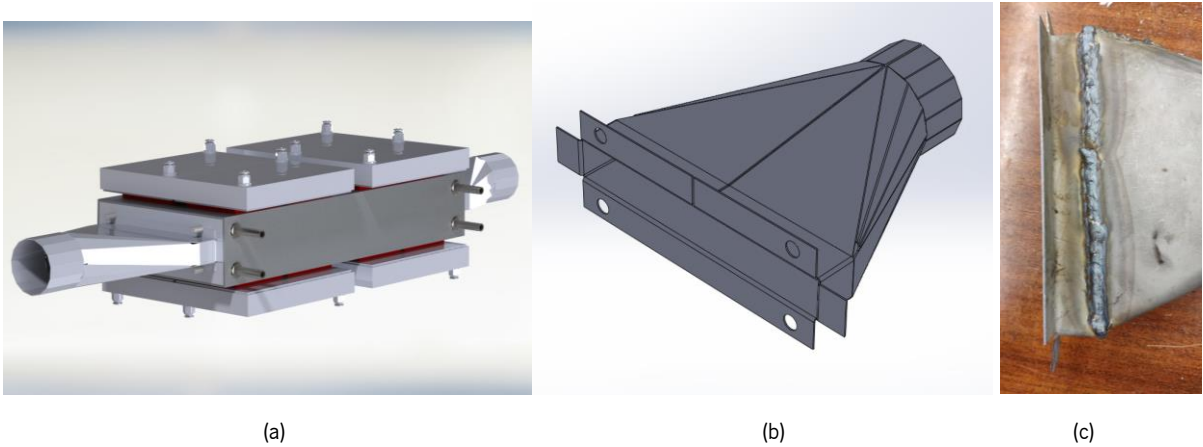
(a)Exhaust Gas Collectors position in TCT;(b) Exhaust Collectors Sheet Metal Drawing, (b) MIG Welding on exhaust collectors and (c) junctions to connect the exhaust pipe.
